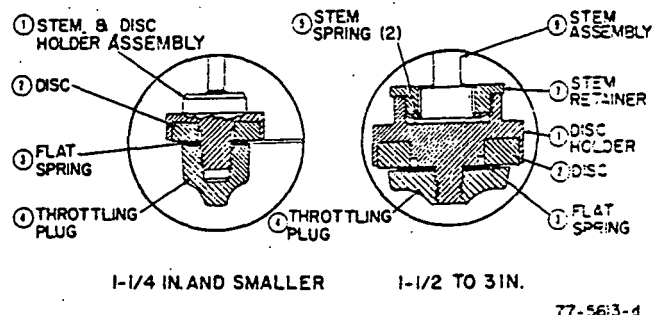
Disc Holder Assemblies Used in V5011A Screwed Type Bodies.
